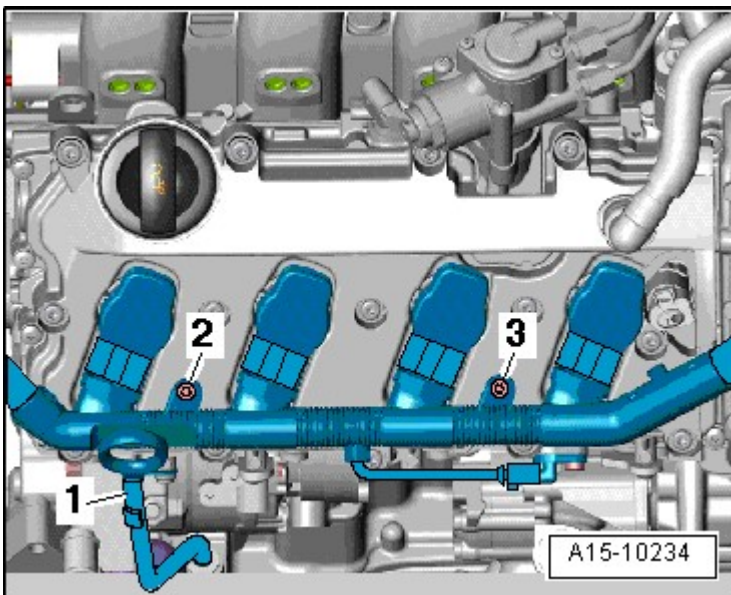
Identifying Oil Dipstick, Bolts & Ignition Coils Electrical Harness Connectors
